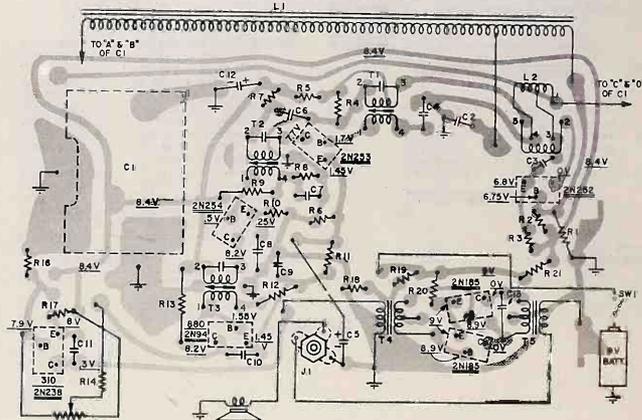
Bottom View of Printed Board Showing Top Components Symbolically
